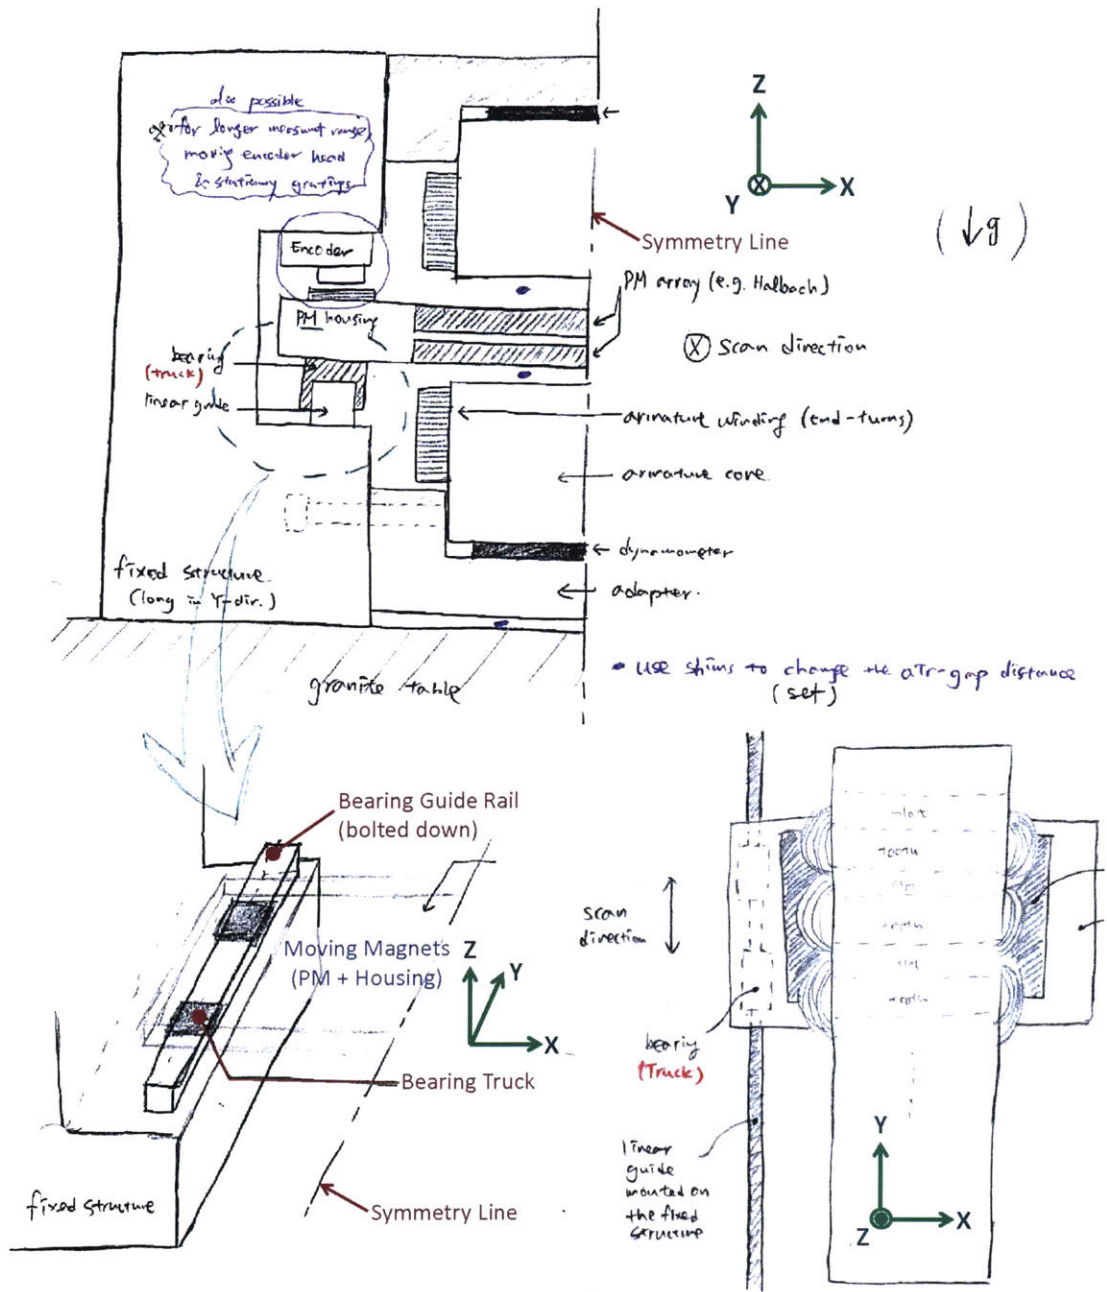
Hand sketch of a possible stage design with moving short magnet and stationary long coil. Front view (upper), isometric view (lower left), and top view (lower right).
